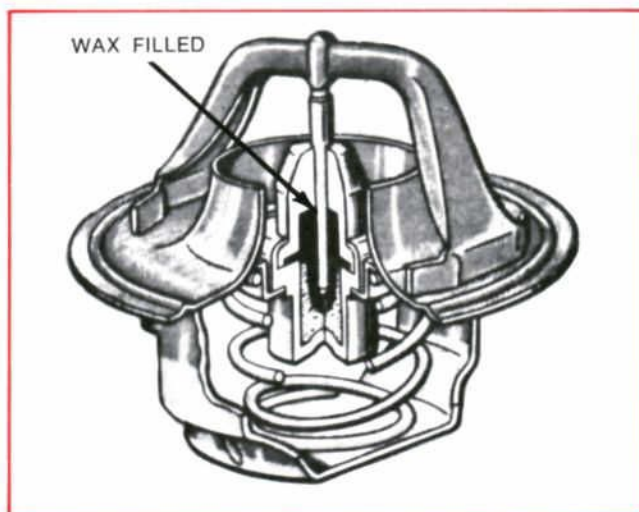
Cross Section View of the "Pellet" Type Thermostat Installed in Late Model Ford-Built Passenger Cars.
